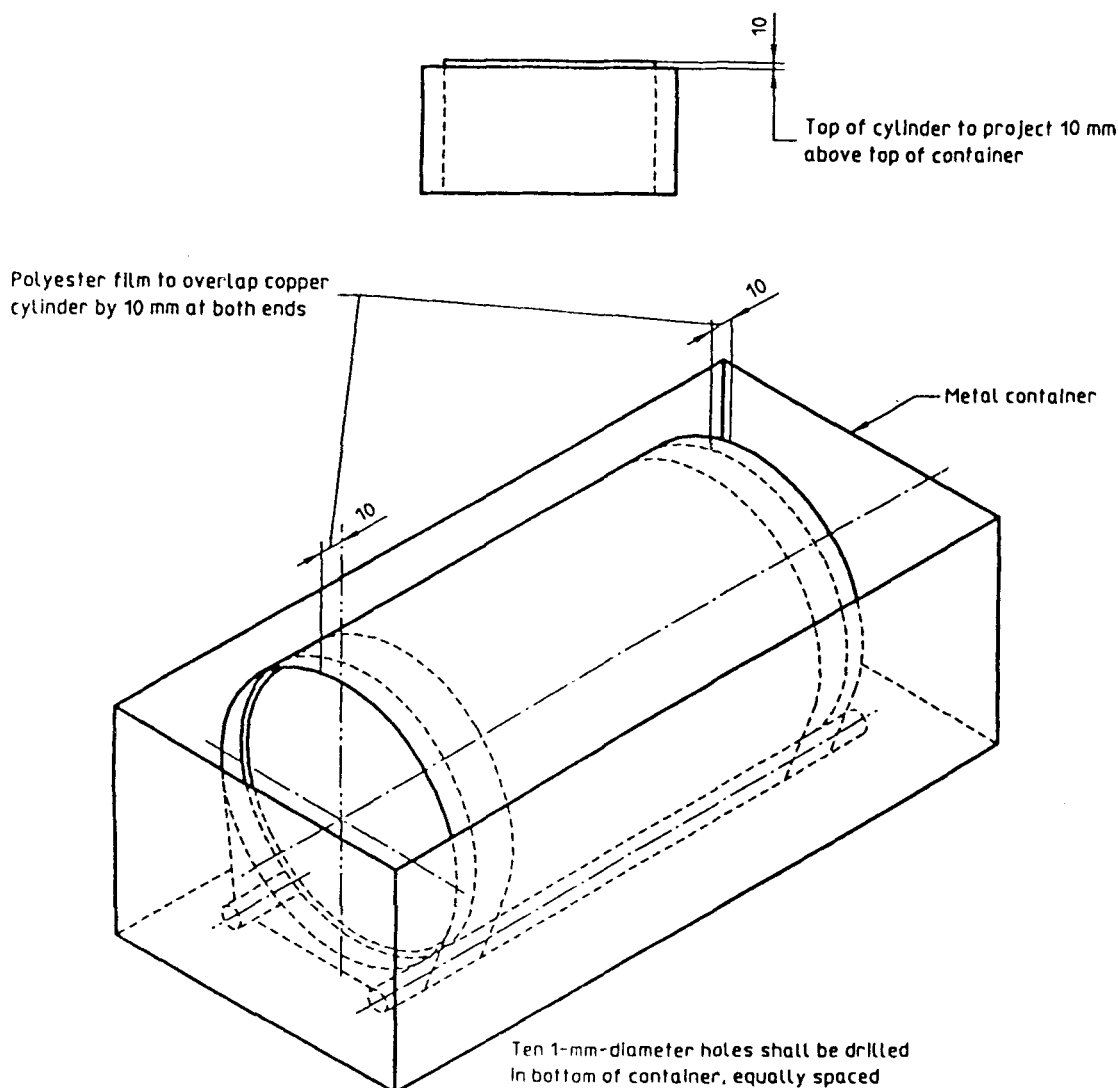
SPECIMEN HOLDER IN CONTAINER
